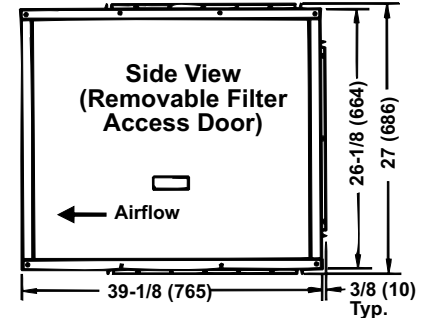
Dimensions of Optional Mixing Box - inches (mm)
